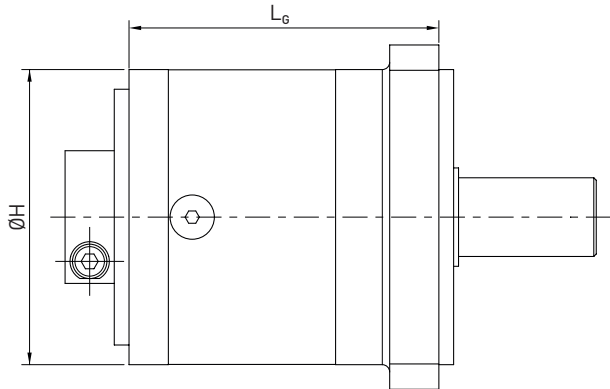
Gearbox dimensioned drawing for linear modules HM-B, linear tables HT-B, cantilever axes HC and double axes HD
